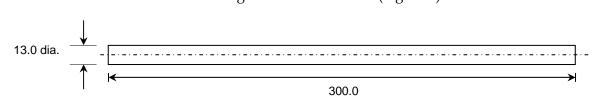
Dimensions (mm) of D6ac rods used for electrical and magnetic measurements
